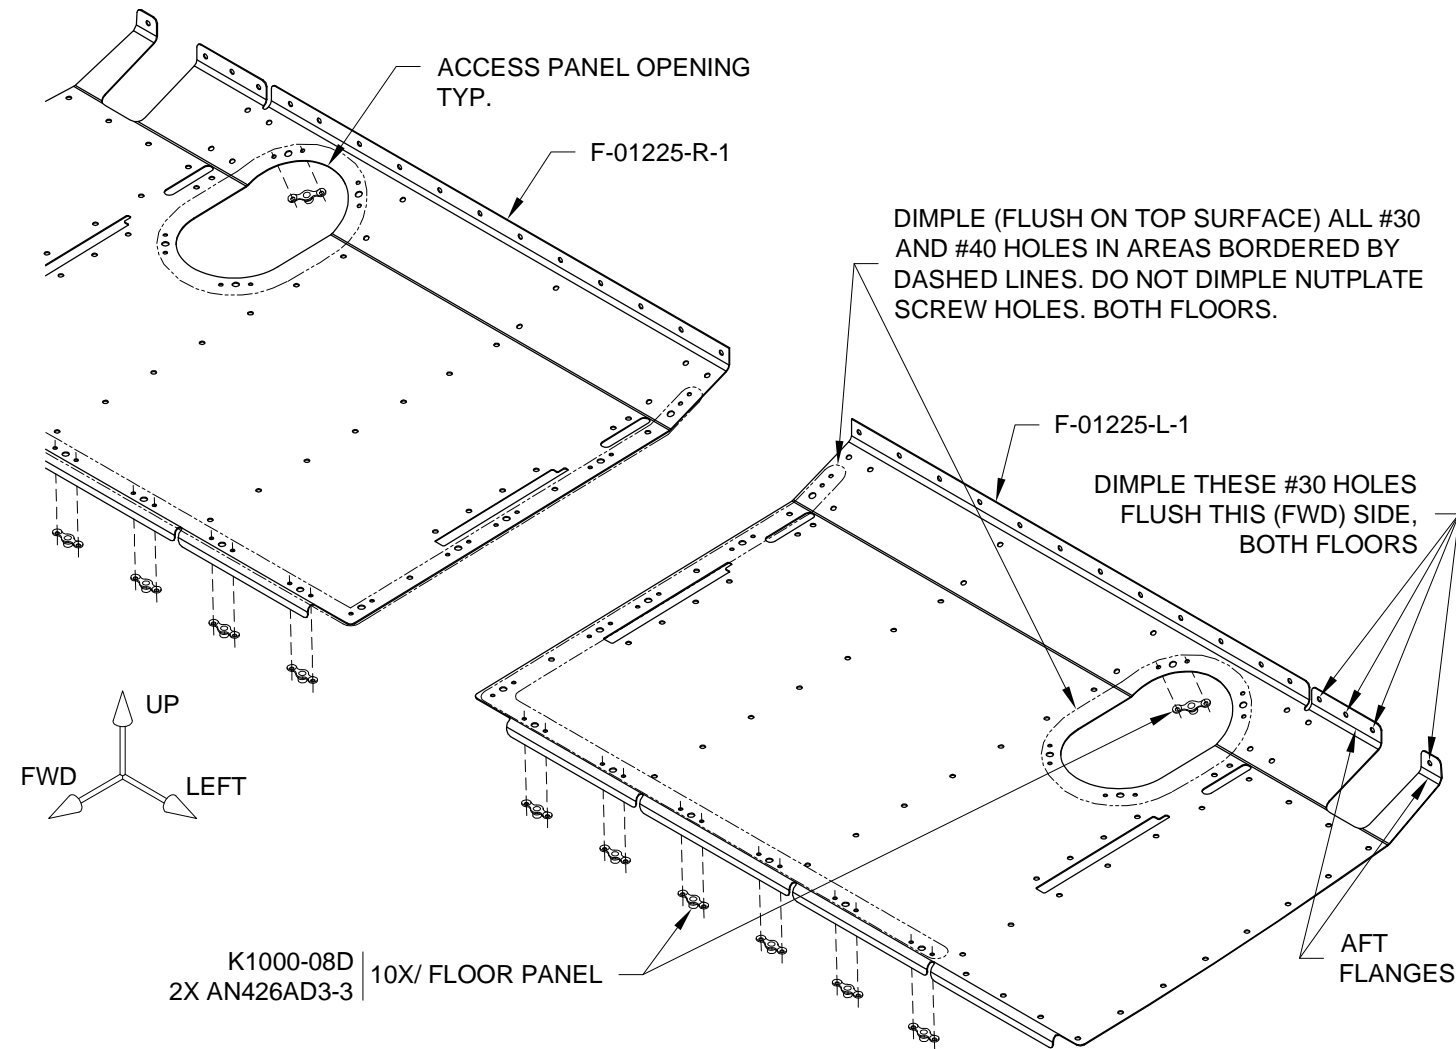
ATTACHING NUTPLATES TO F-01225L-1 & -R-1
